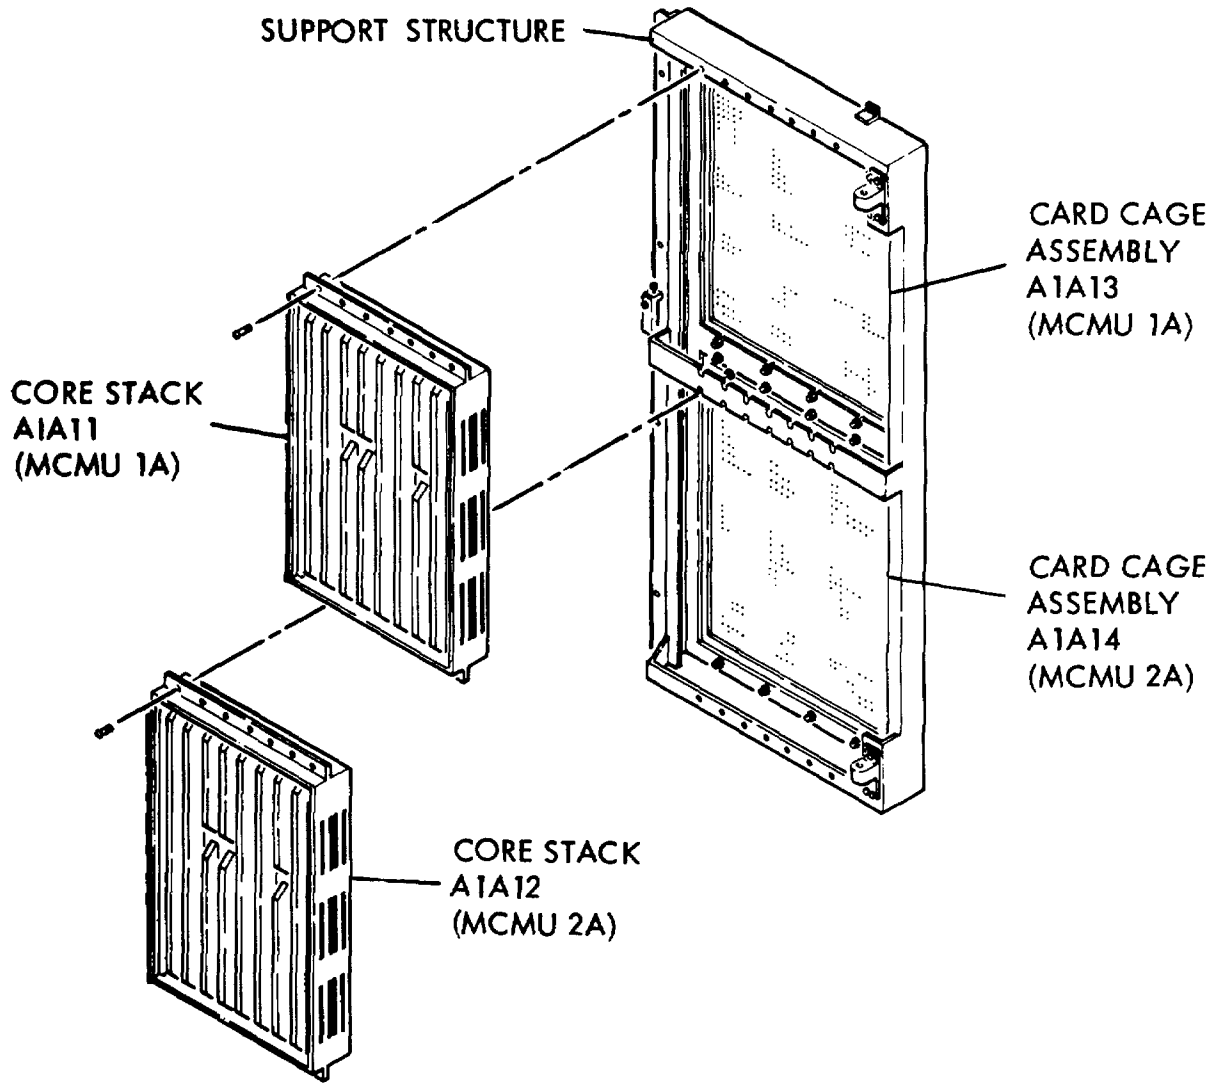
Circuit Switch ADP Assembly (Sheet 1 of 5).
